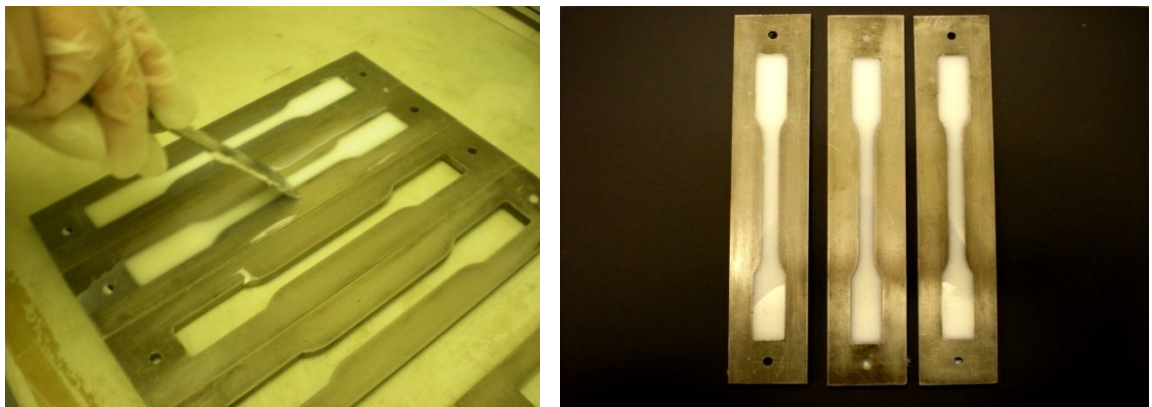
Fabrication of dumbbell-shaped tensile sample
